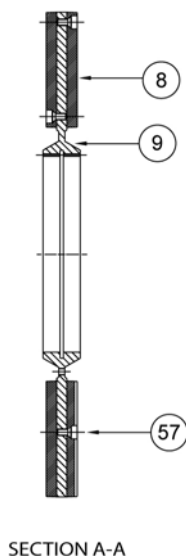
36WCBE/WCSEP FRICTION DISC ASSEMBLY
